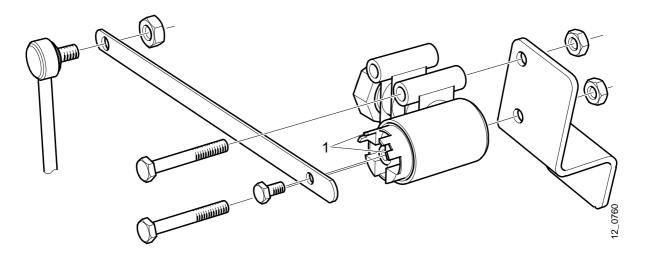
Fitting drive axle level sensor. N.B. The raised lugs (1) on the rotating bracket are turned up in order to achieve correct sensor operation.
